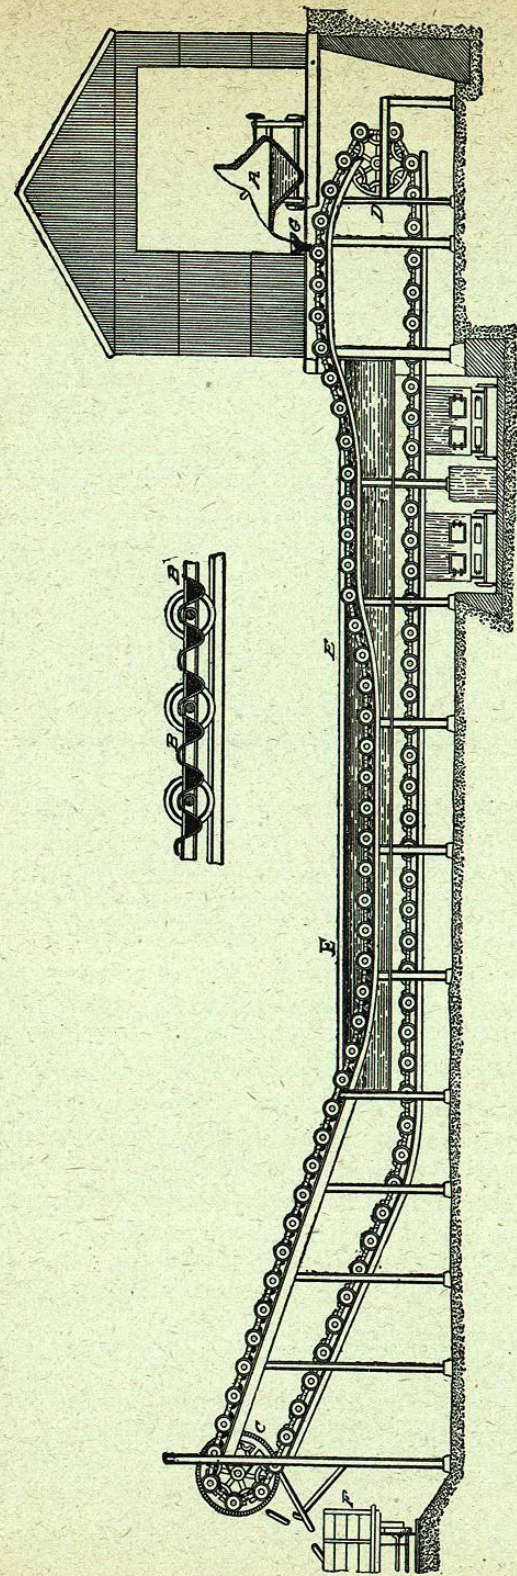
Diagram of Uehling's Pig-casting Machine.
